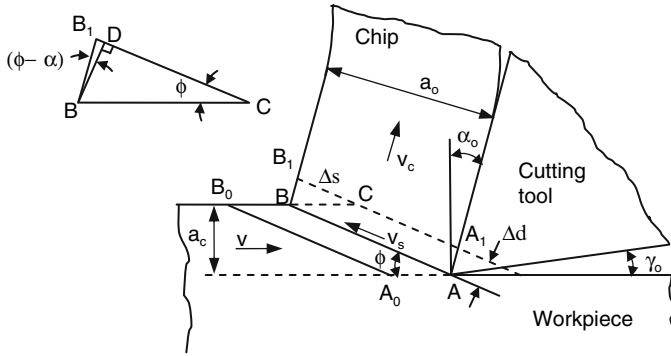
Two-dimensional representation of orthogonal cutting. AB is the shear plane, ϕ is shear plane angle, α_o is rake angle, γ_o is clearance angle, a_c is uncut chip thickness, and a_o is deformed chip thickness
